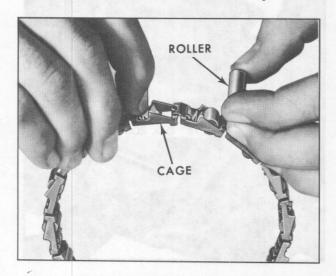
Installing Rollers in Roller Clutch Cage
